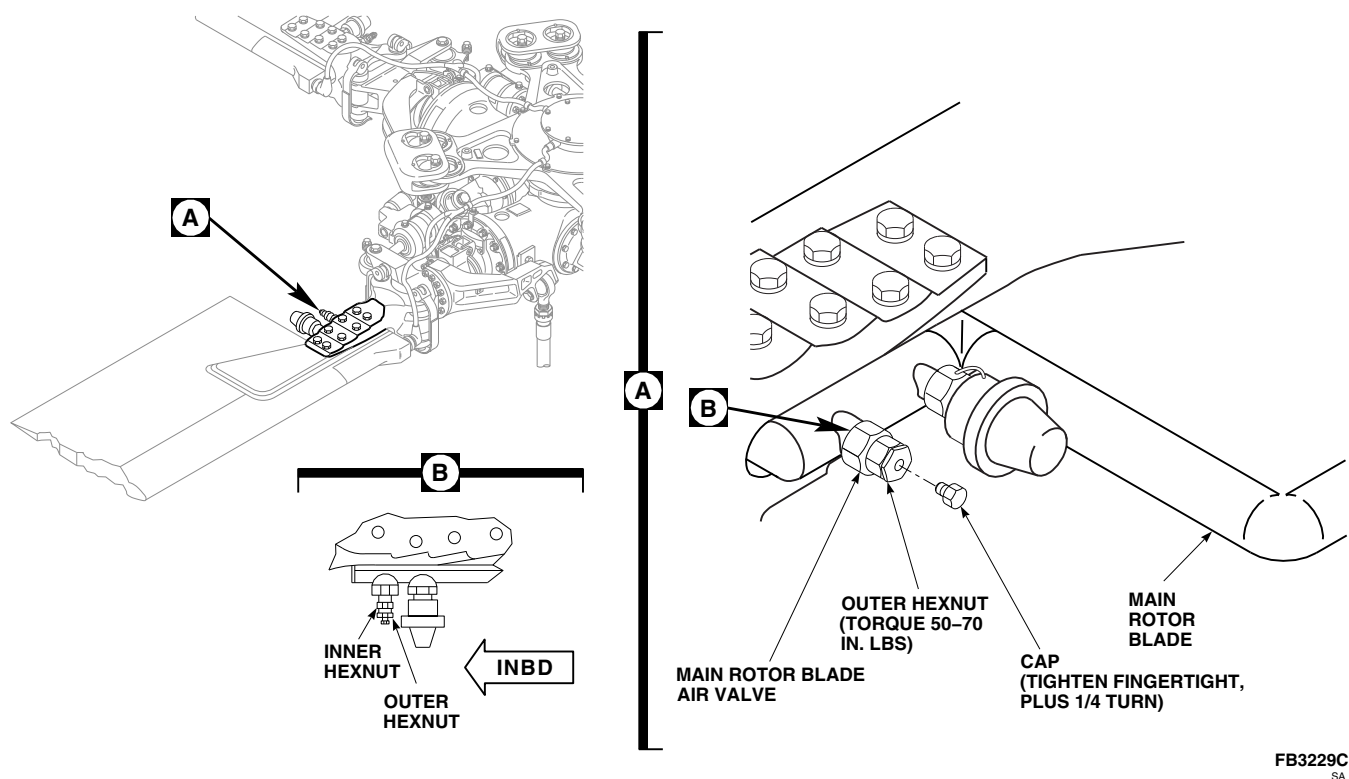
INSPECT MAIN ROTOR BLADE SPAR PRESSURE
